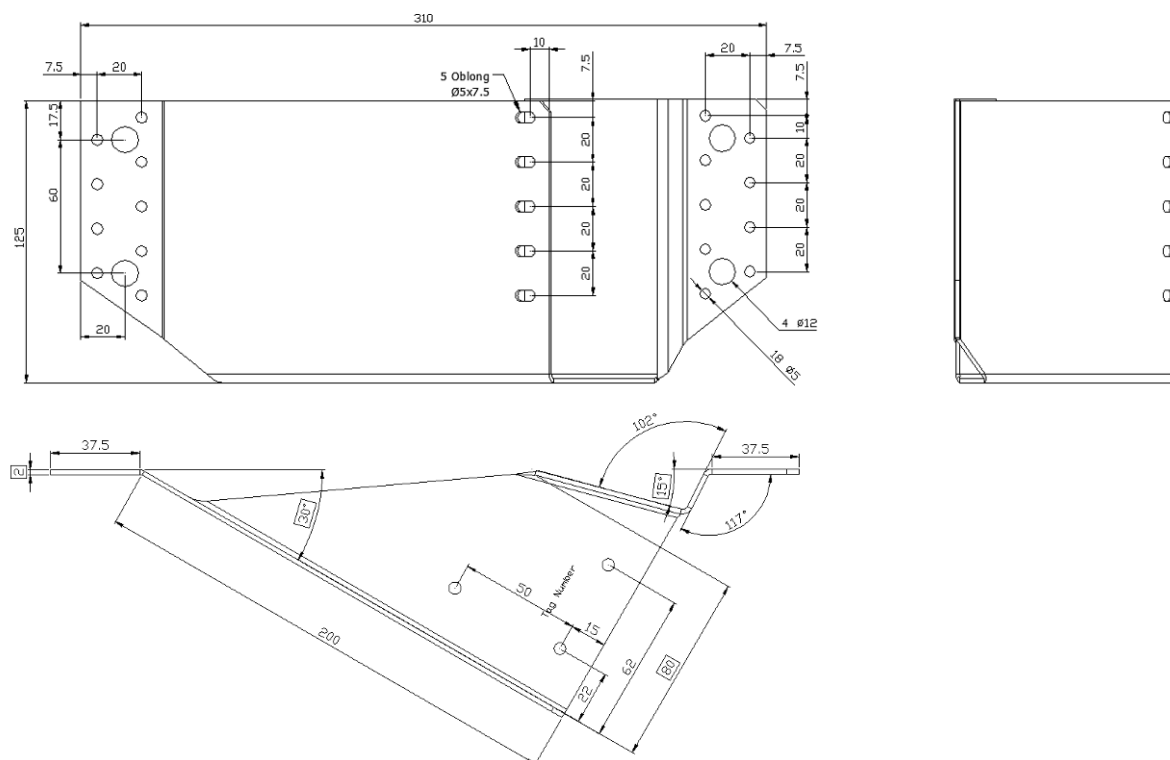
Dimensioned drawing of skewed hanger S1530D/38/1.5
